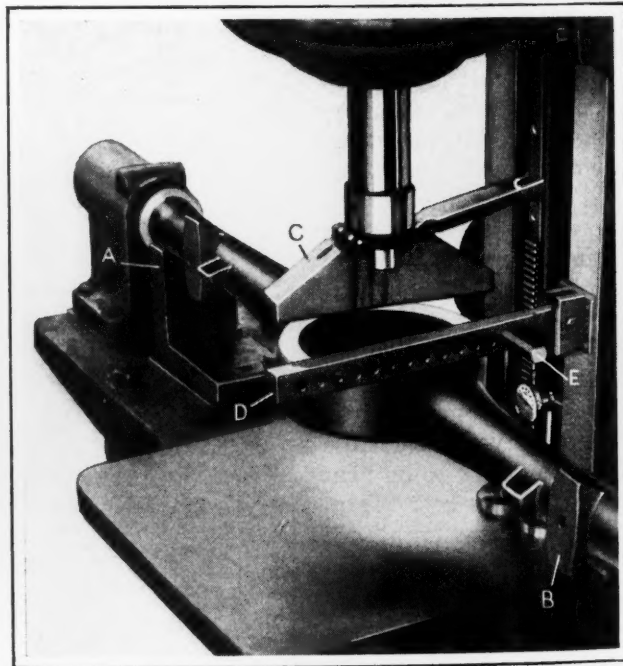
Performing a Straightening Operation on the Rear Axle Housing
